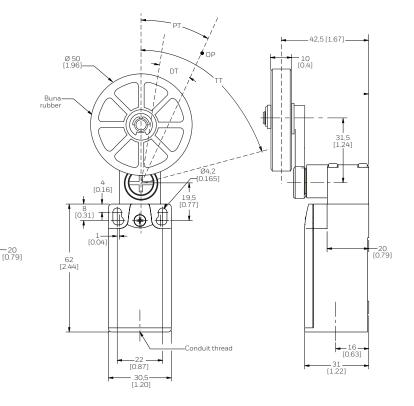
GLL Side Rotary (A1B) with Fixed Lever Dimensions Figure 3. GLL Side Rotary (A3B) with Fixed Lever Dimensions
